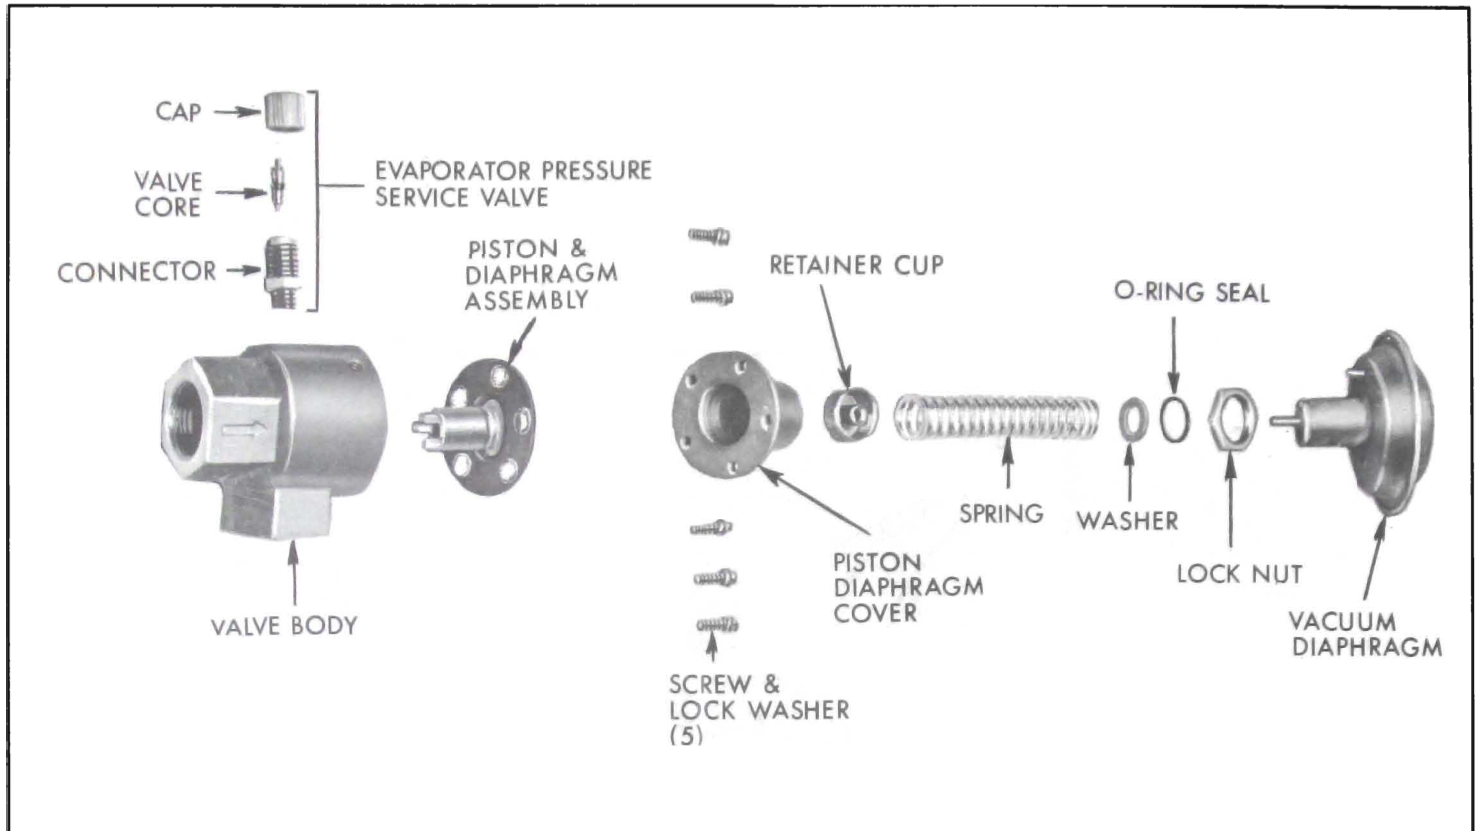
Suction Throttling Valve (Exploded View) - 4700 Series
